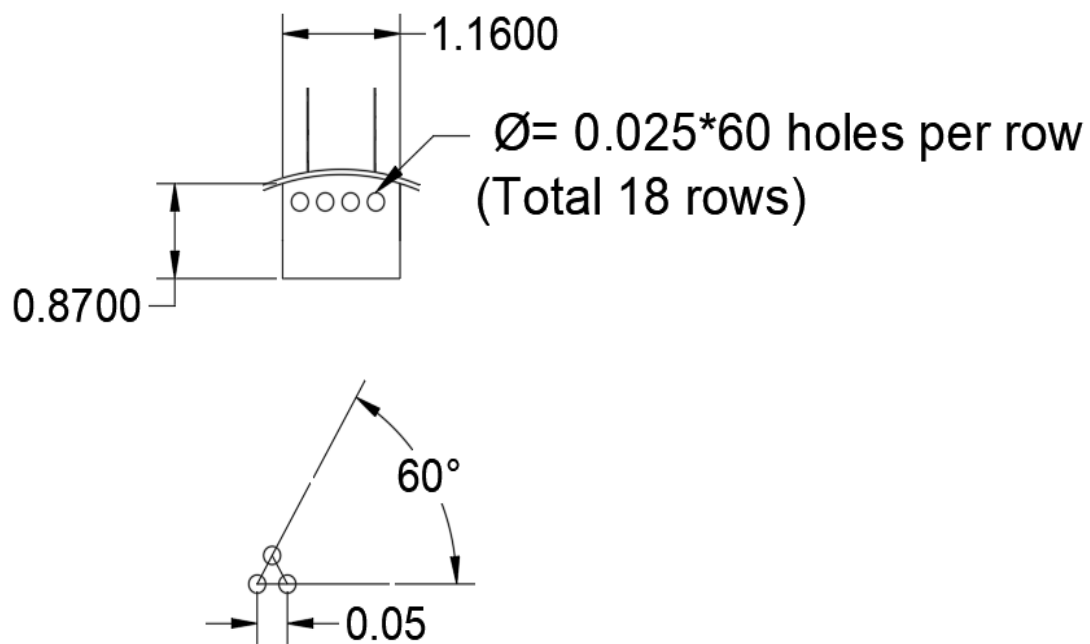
Detailed mechanical drawing of distributor in LTS
